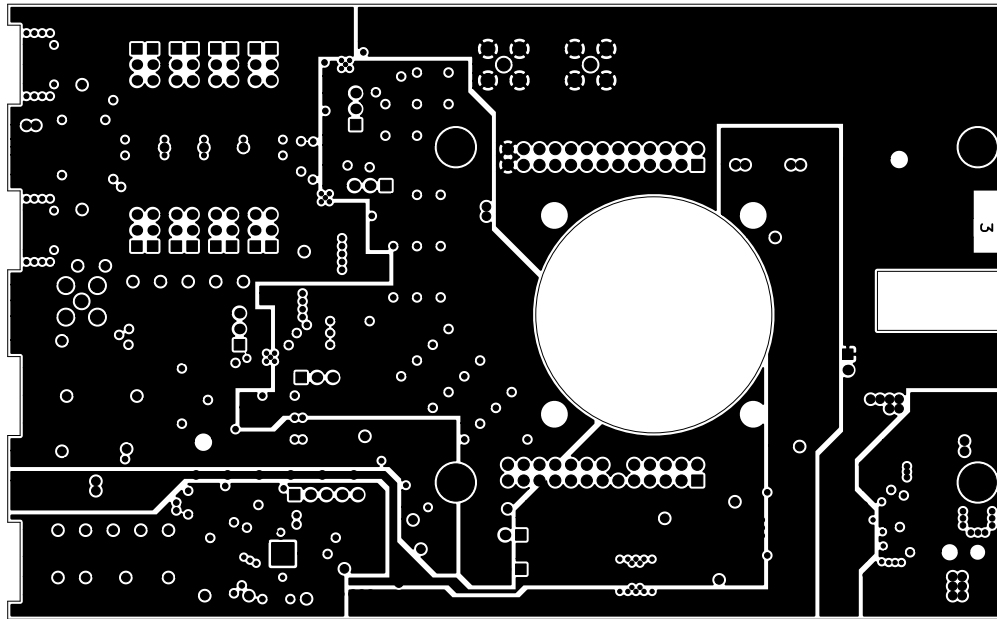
PCB layout - Inner layer 2 (Supply planes)
